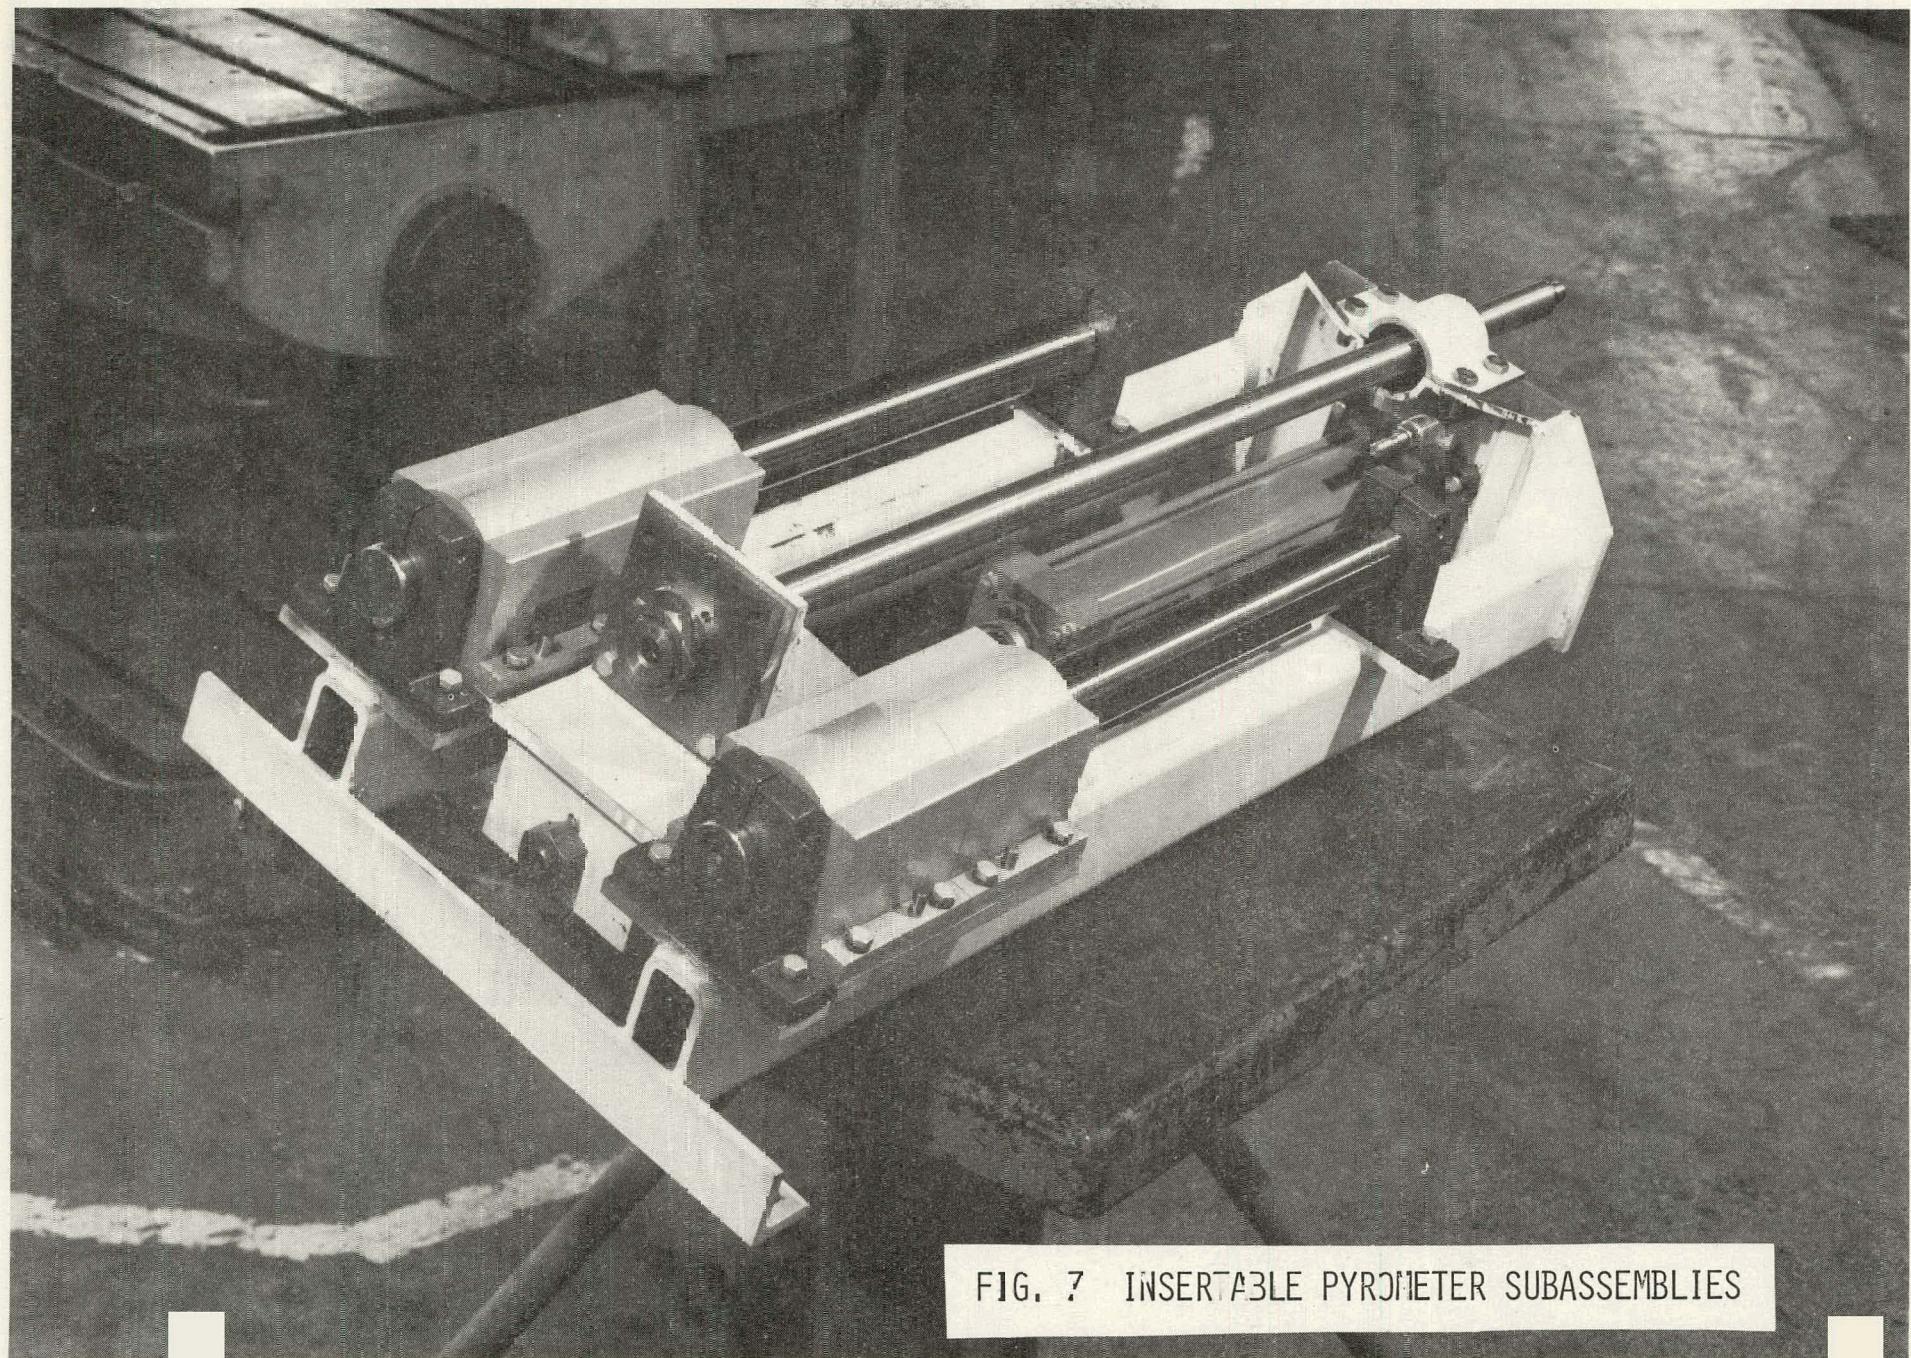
INSERTABLE PYROMETER SUBASSEMBLIES
